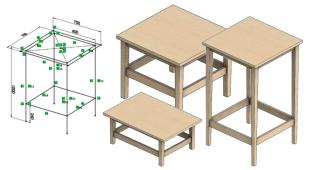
Model of bar table made with the use of "welded constructions" and "sheet metal" tools
